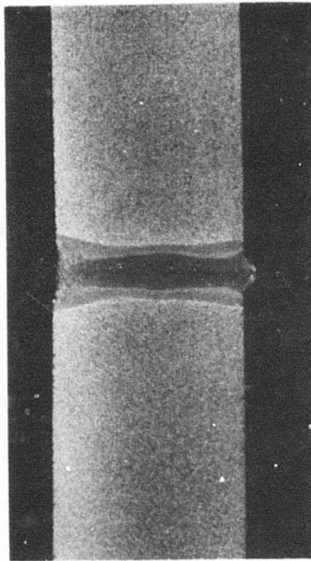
WELD CROSS SECTIONS (LOW ALLOY CARBON STEEL)
